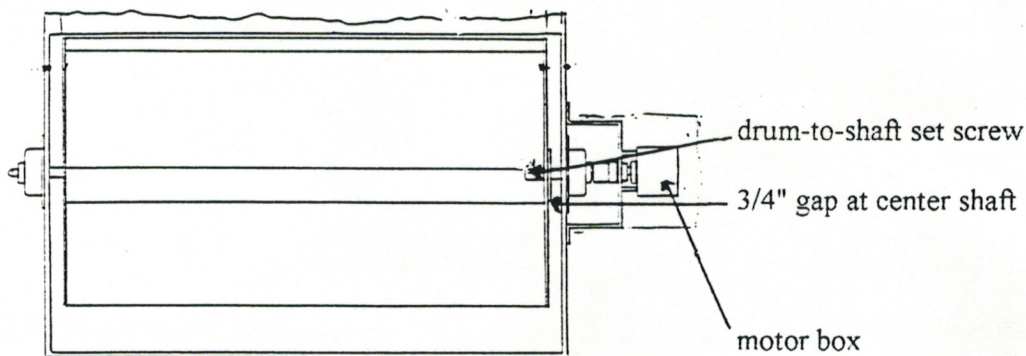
Schematic of drum (top view, looking down at drum and showing drum-to-shaft set screw location)
